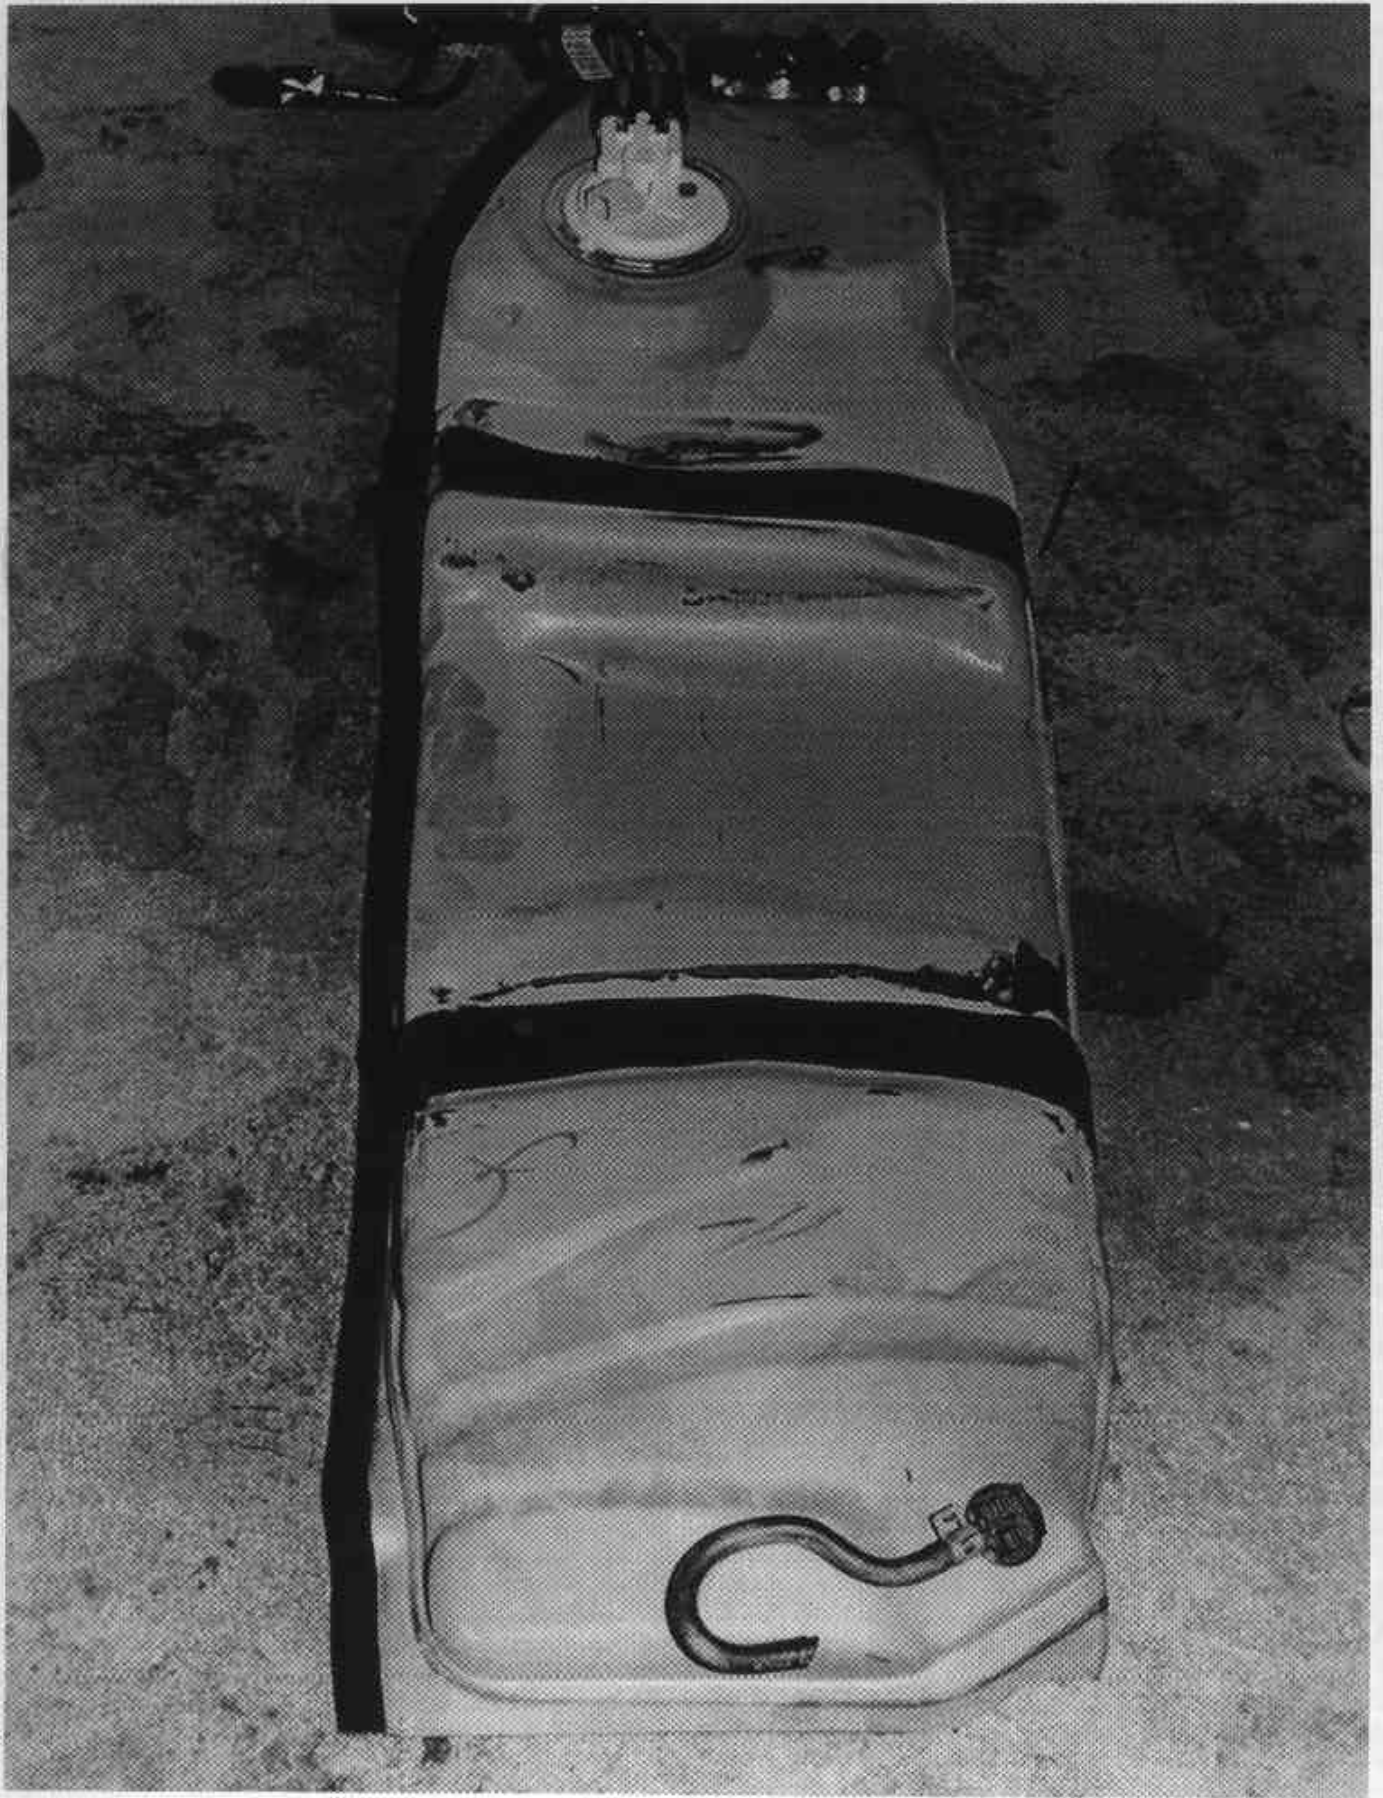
Post-Test Fuel Tank Removed From Vehicle - View 1
